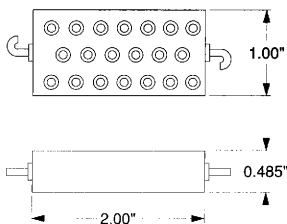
Scale drawing of the stainless steel slider that holds the particles to be flash evaporated.
